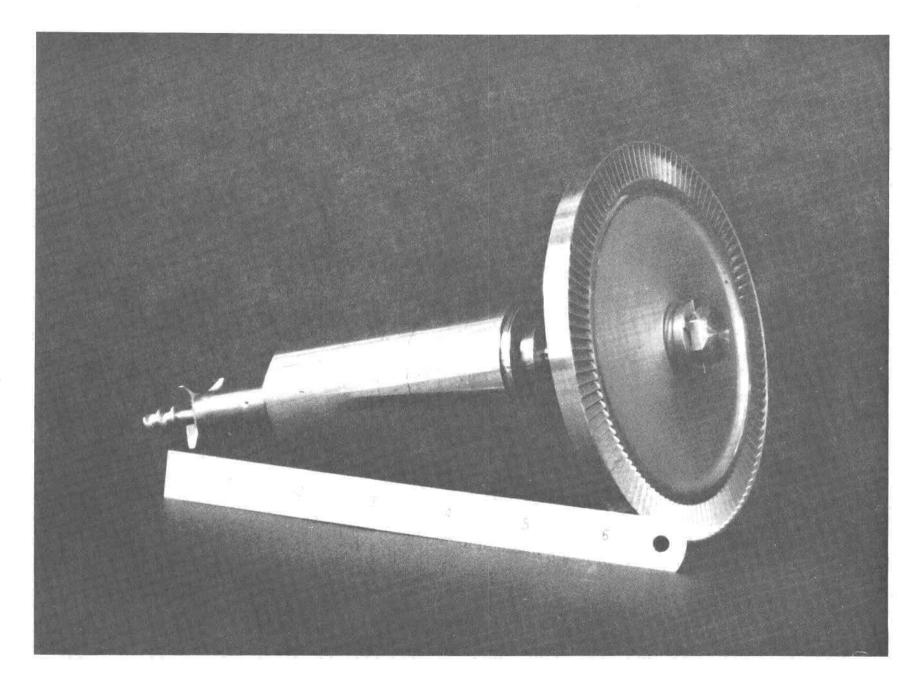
Complete TAP Rotor with Turbine, Alternator, Pump, and Thrust Runners. Note that one lubricant exit hole is visible between the pump and alternator on the shaft
